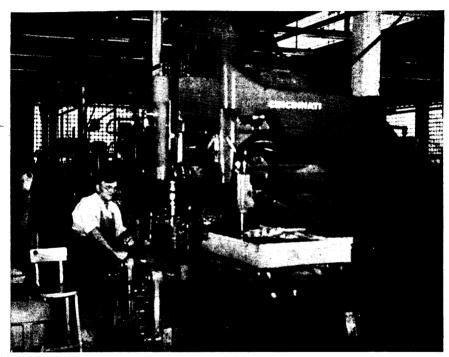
The Hydrotel is also a duplicating machine but, being larger in size, is better adapted to the making of larger dies.
